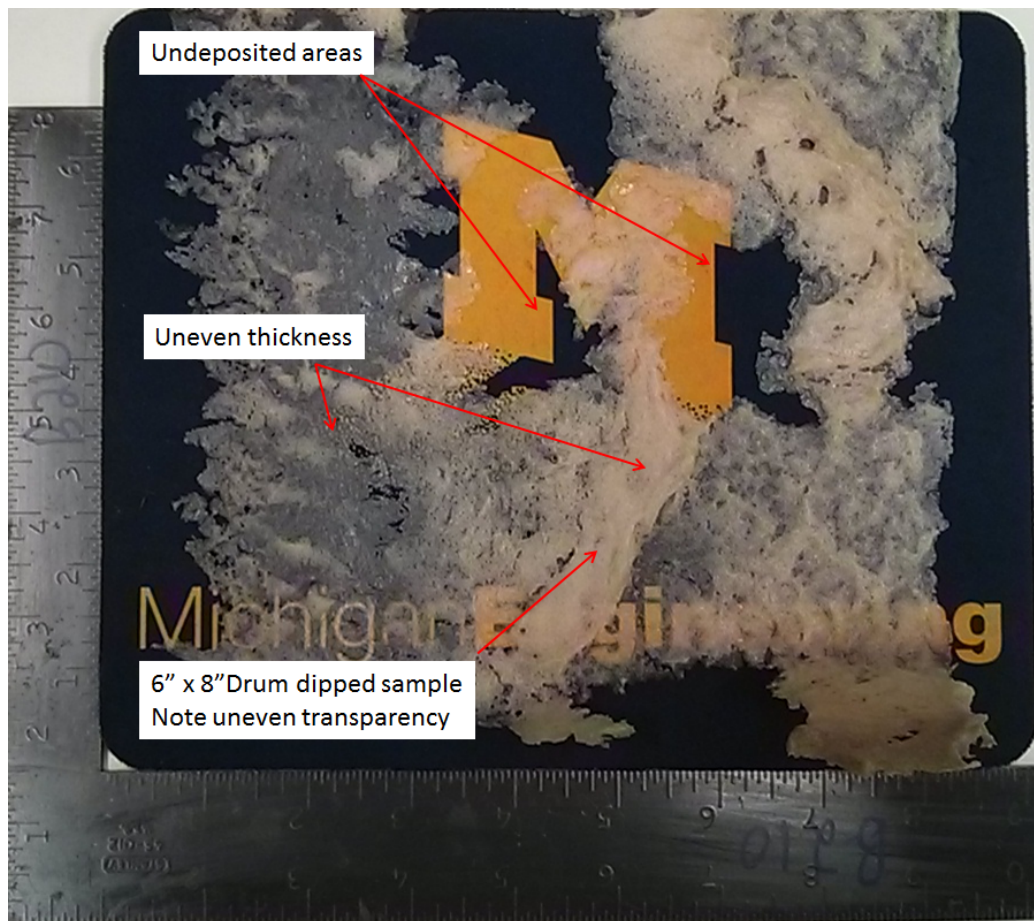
Detached LBL Film manufactured by Rotating Drum LBL Machine
